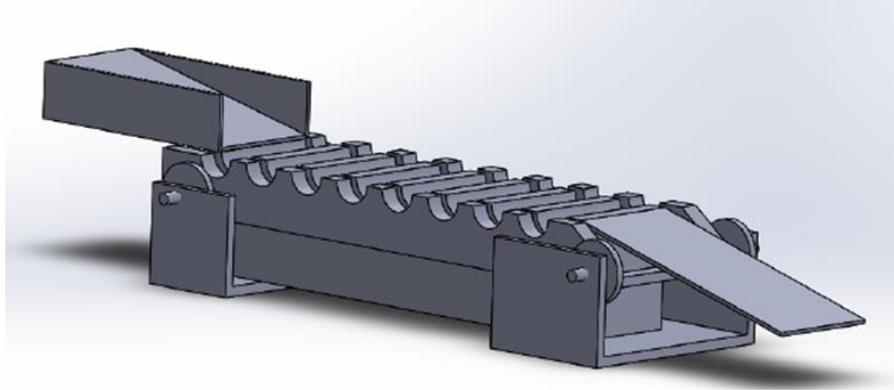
CAD model of assembled walking beam conveyor component. Parts are to be to the chute at left by the feeder mechanism operated by the Geneva mechanism. The outer rack is stationary while the inner rack is moved by an eccentric drive mechanism. This motion moves the parts intermittently to the right.
